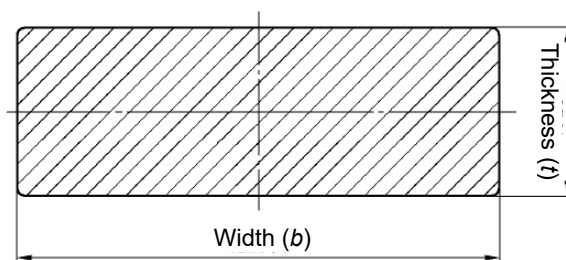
Schematic diagram of cross-section of hot-rolled flat steels
